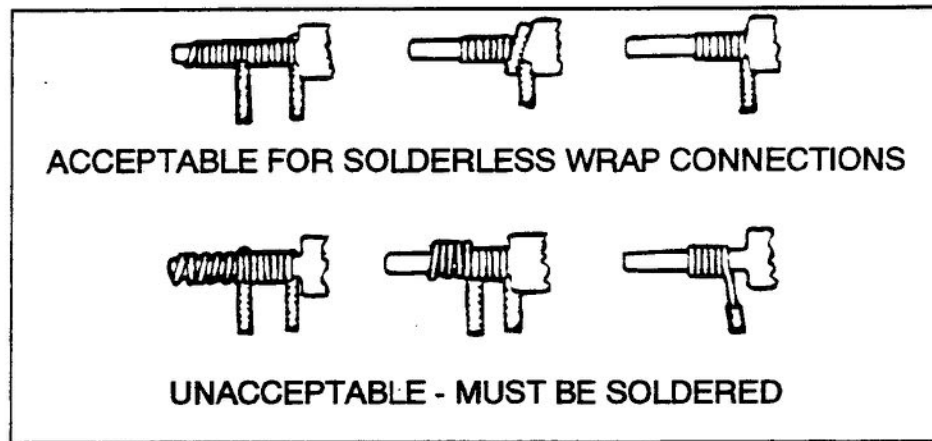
Wire-wrap connections—acceptable and unacceptable.
